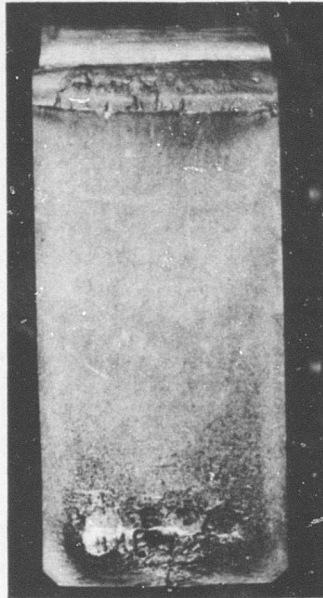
Photomicrograph of Surface of Failure of Tooth From Test Gear.
